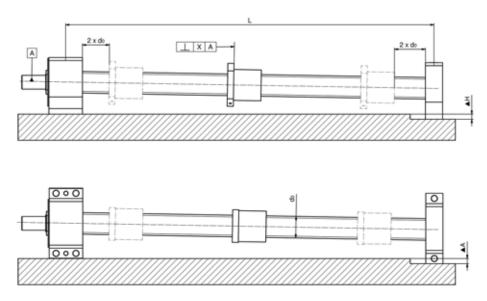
Definition of the assembly tolerances of Ball Screws
